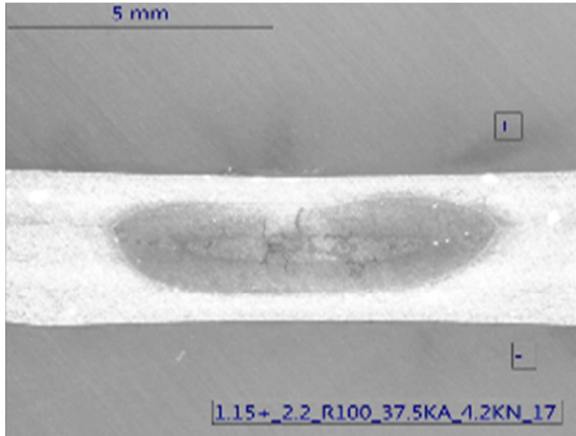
Metallographic inspection status of RSW under different welding pressures.
